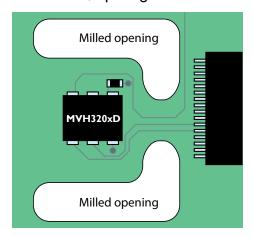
Thermal isolation of sensor using milled PCB openings.
